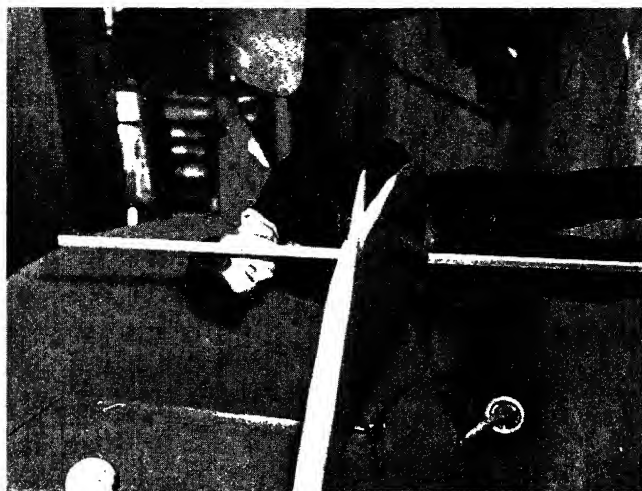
METHOD OF ADJUSTING ELEVATORS.
